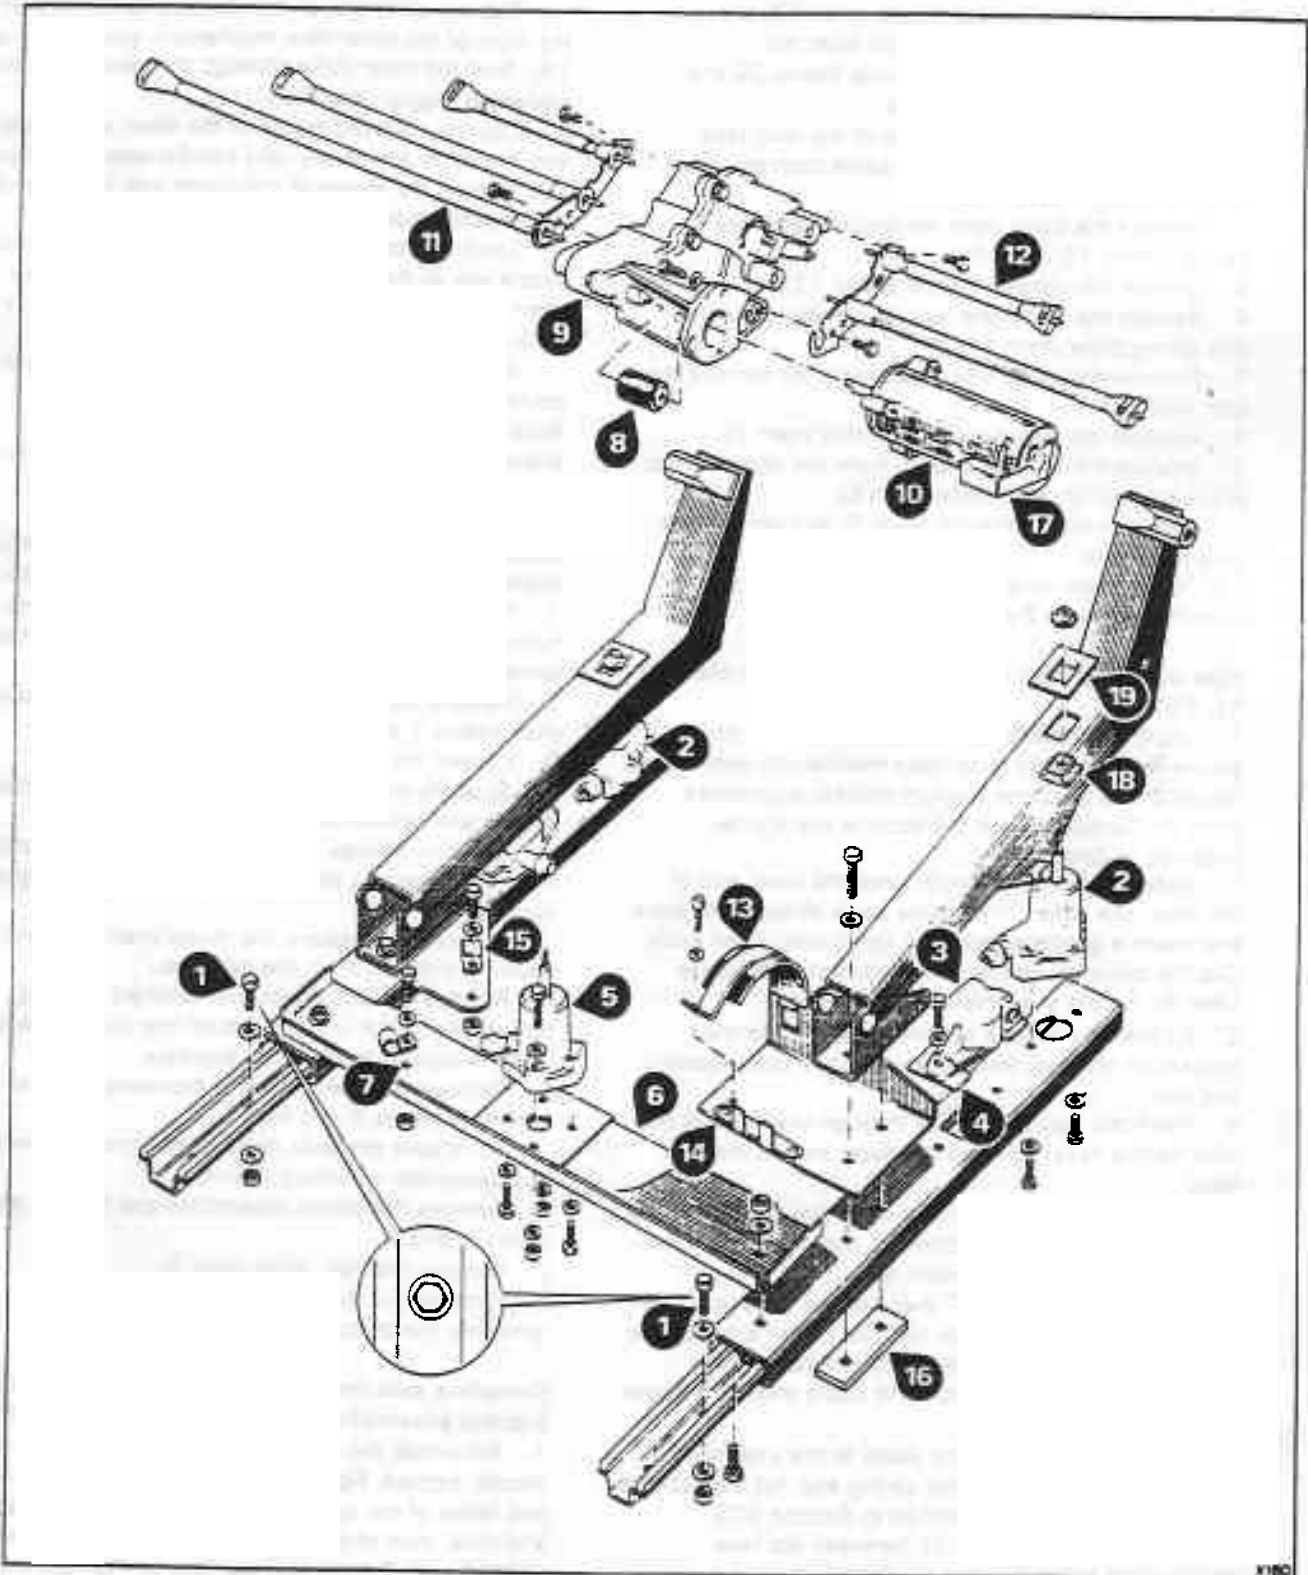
Assembly of seat motor, gearbox, jacks, and fulcrum brackets
